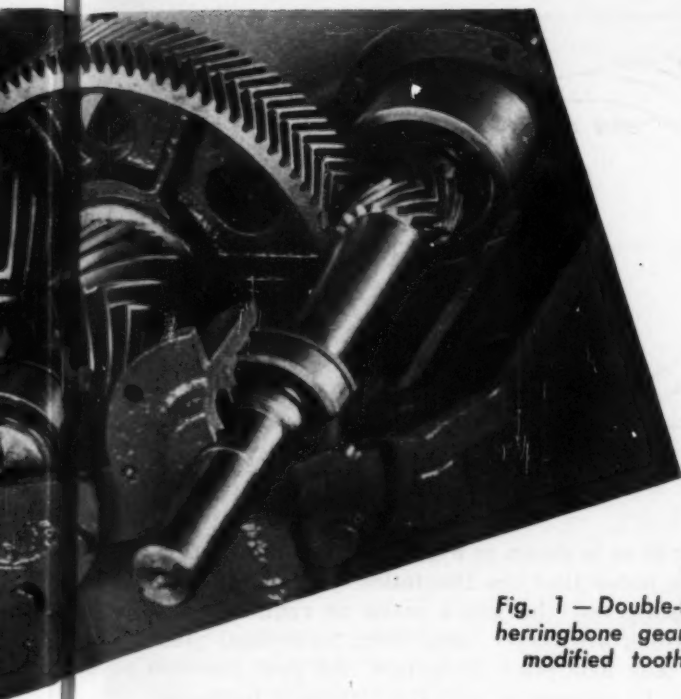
Double-reduction herringbone gearing with modified tooth form
